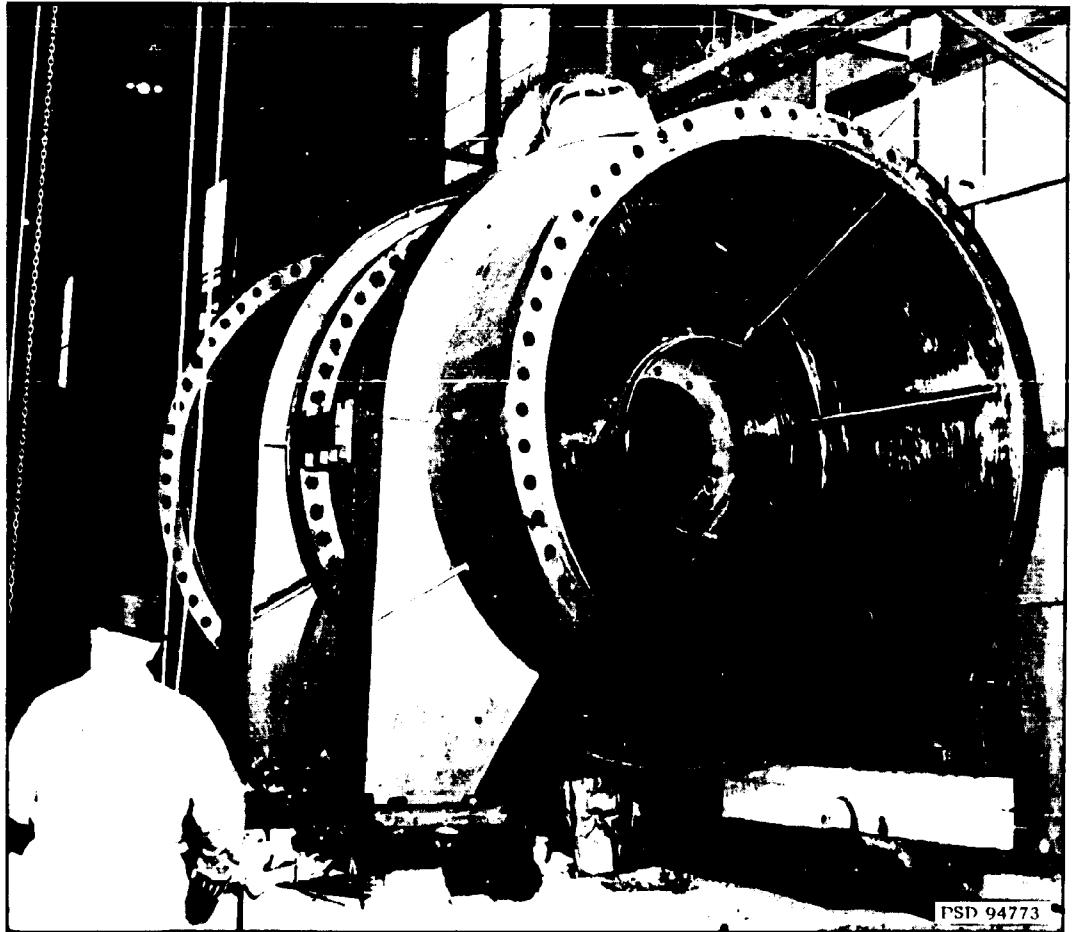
30-Inch Water Tunnel Pump Being Installed at the Site
